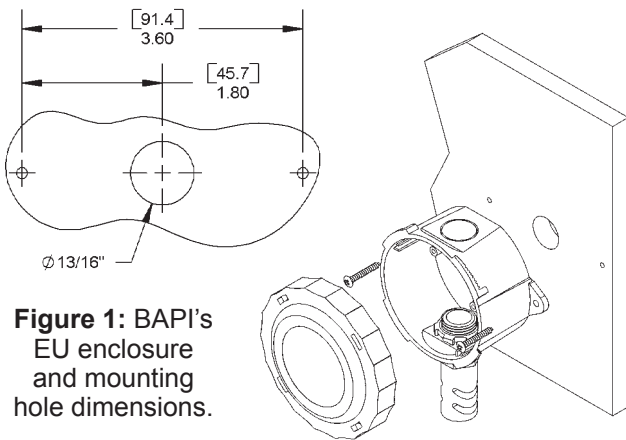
BAPI's EU enclosure and mounting hole dimensions.
